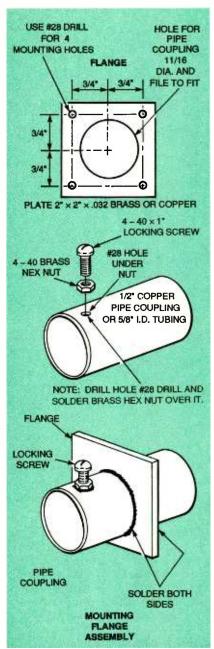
DETAILS AND DIMENSIONS for the mounting flange assembly.
